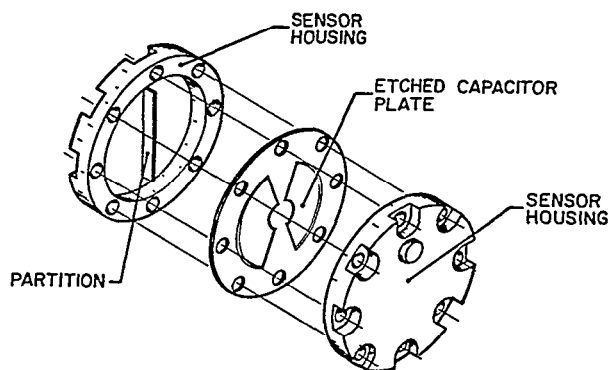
Exploded View of the Sensor Housing and Capacitor Plate
